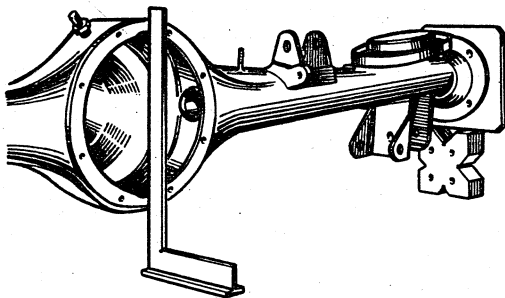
Checking the Final Drive Mounting Surface for Perpendicularity
